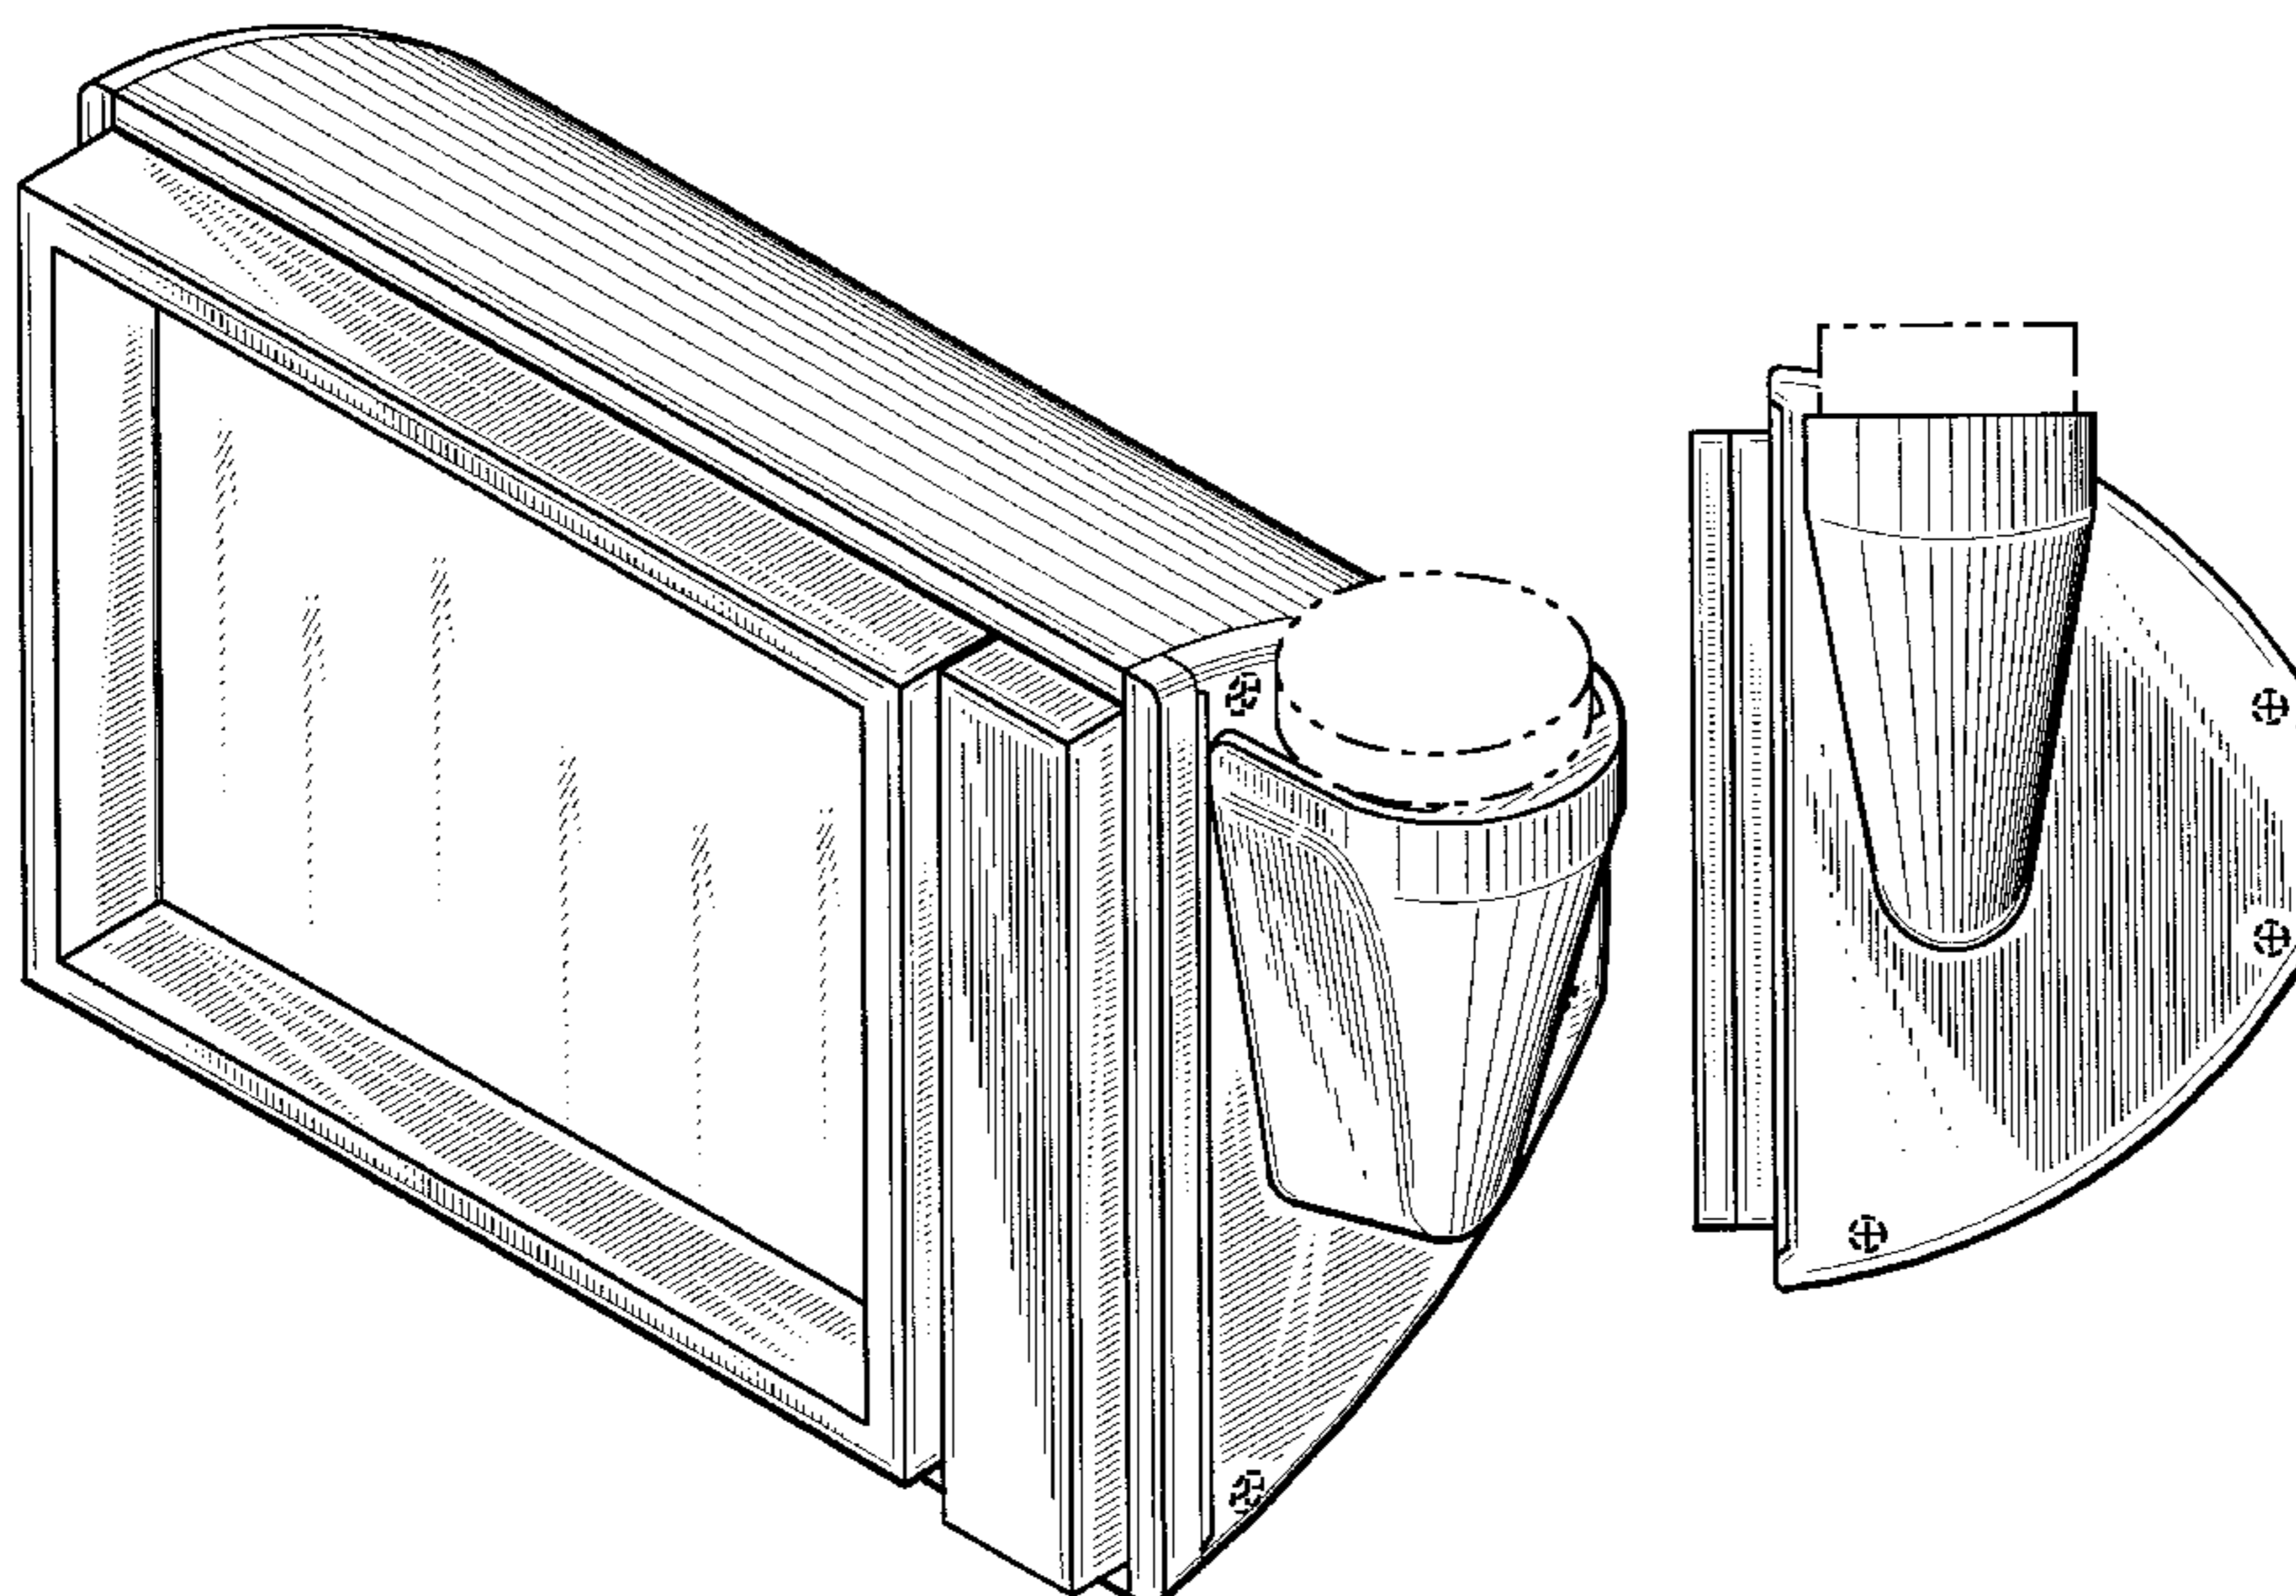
is a left side view of the lighting fixture shown in FIG. 1;
